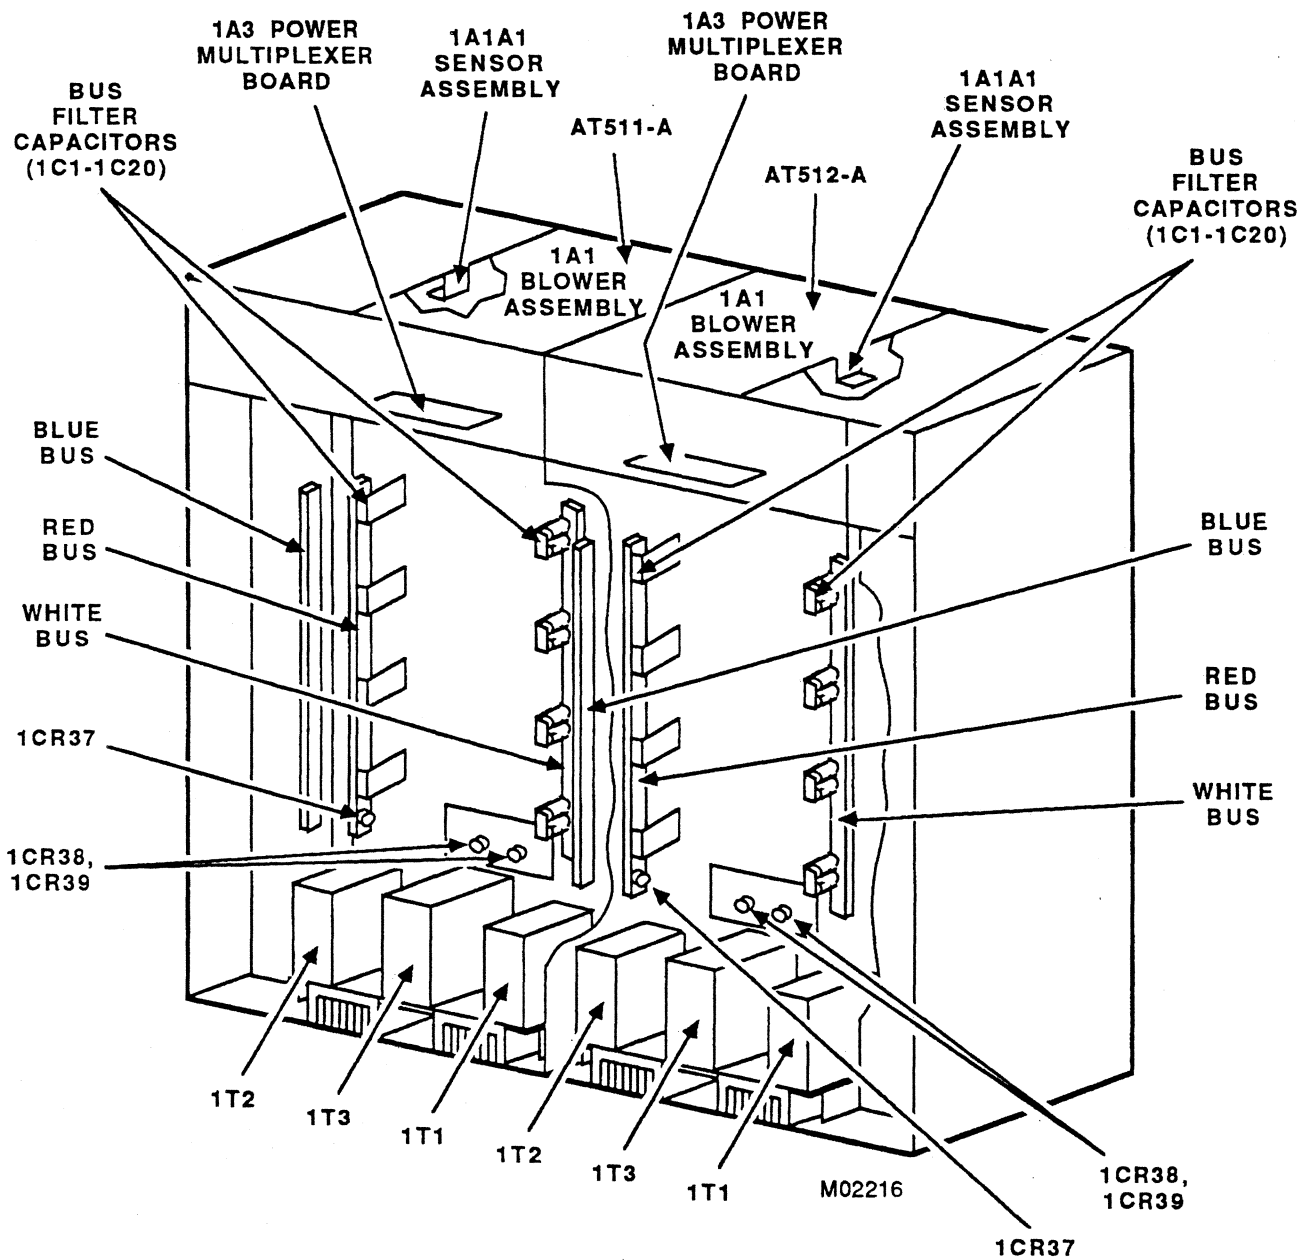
Cabinet Rear View, Selected Assembly Locator
